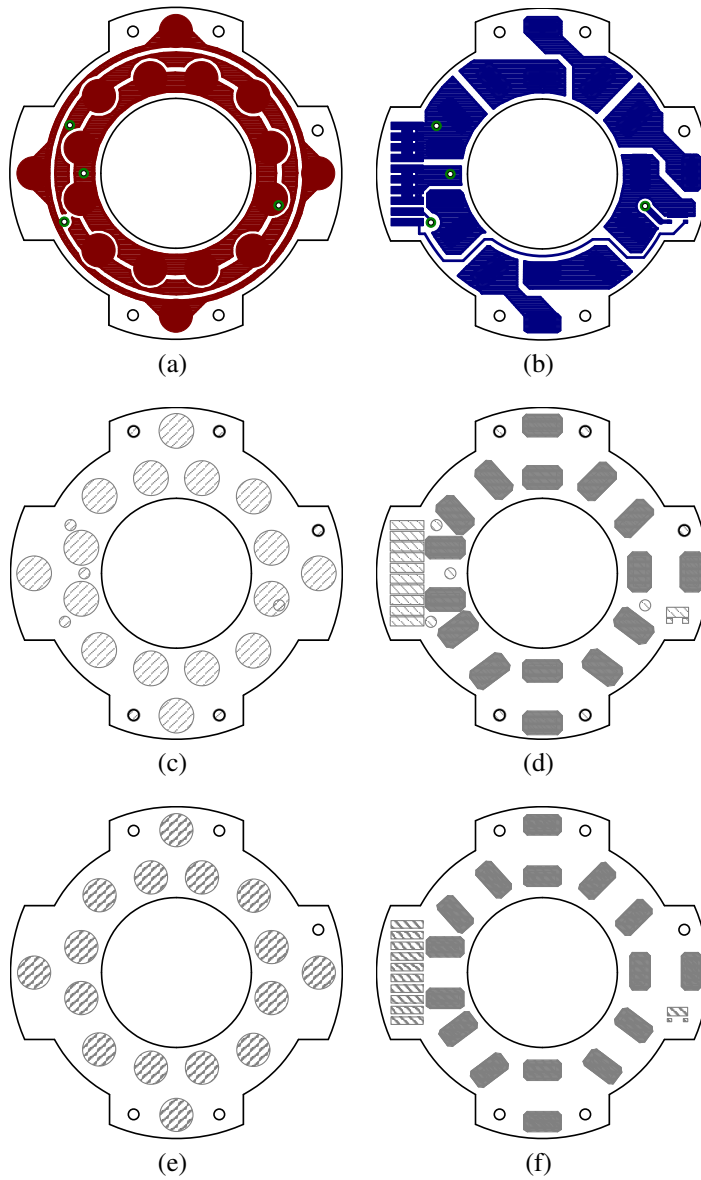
PCB layout drawings for an implementation of a self-soldering connector with approximately  $11\frac{1}{4}\text{ in}^2$  ( $820\text{ mm}^2$ ) connector surface area. (a), (b): Copper layer, red top, blue bottom, green plated holes. (c), (d): Soldermask stop layer, hatched and shaded regions define areas of exposed copper layer. (e): Stencil layer top, regions where fields metal application is intended. (f): Stencil layer bottom, regions where solder paste is deposited during assembly of resistive heater and other circuit components. (a), (c), (e) represent the Field's Alloy side of the PCB, (b), (d), (f) the heater side. All figures show the PCB outline and five non-plated drill holes.
